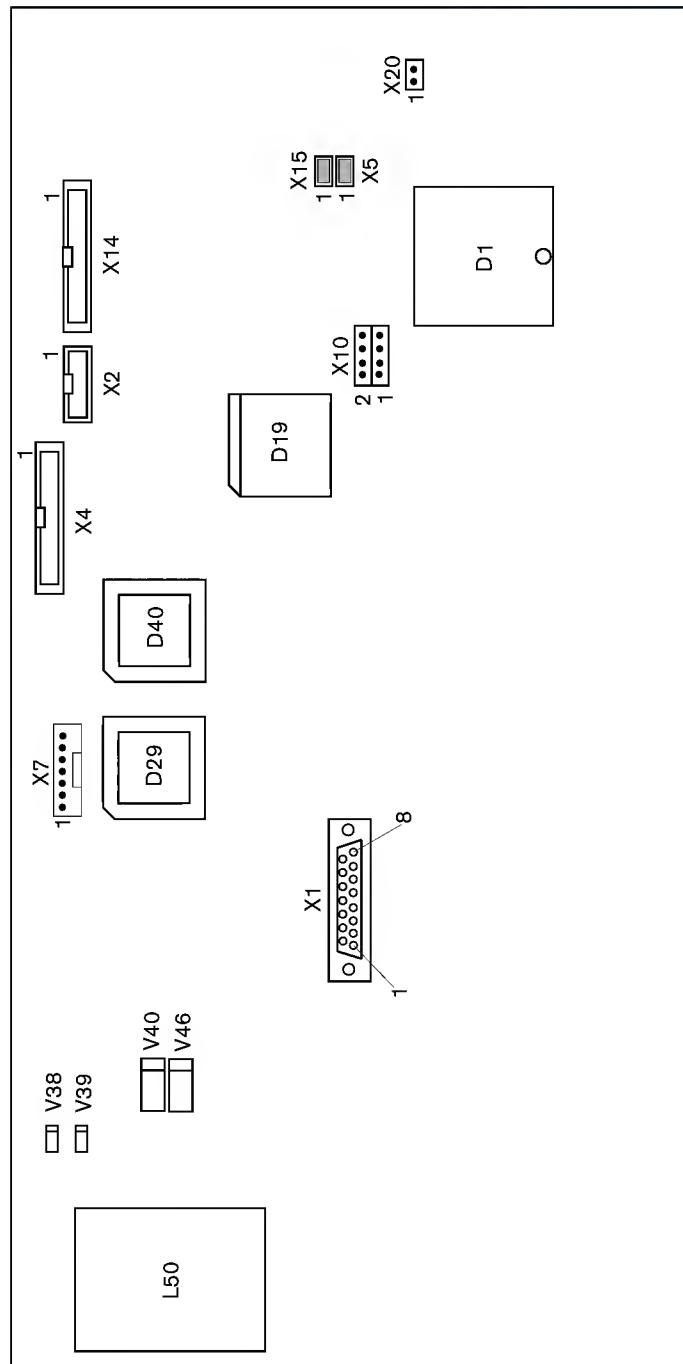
Components mounting diagram of the Graphics Controller PCB
